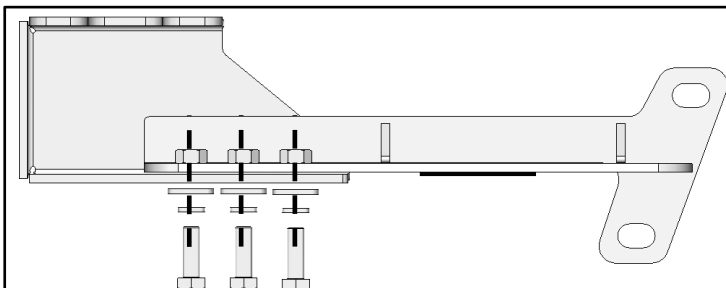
Install the PS mounting bracket 1 using the double bolt plate
